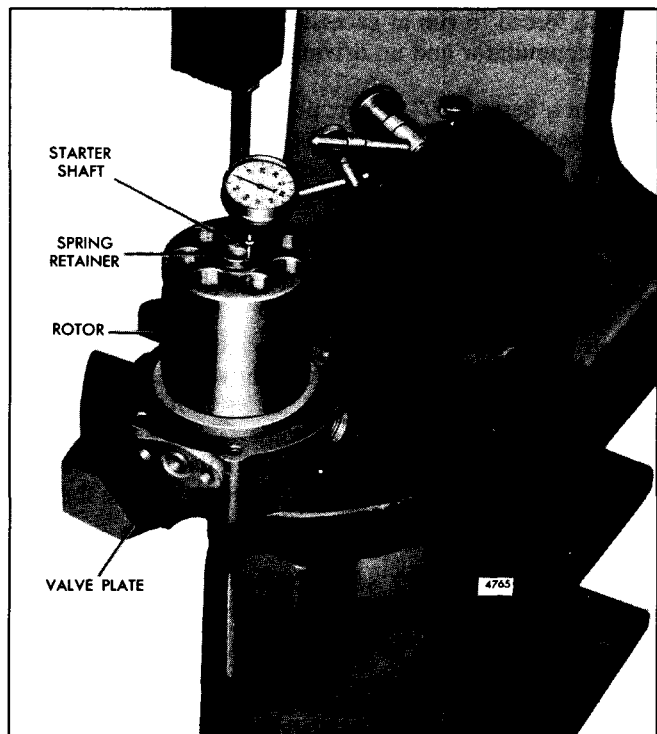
Checking Starter Shaft Travel (Series "20" Motor)
